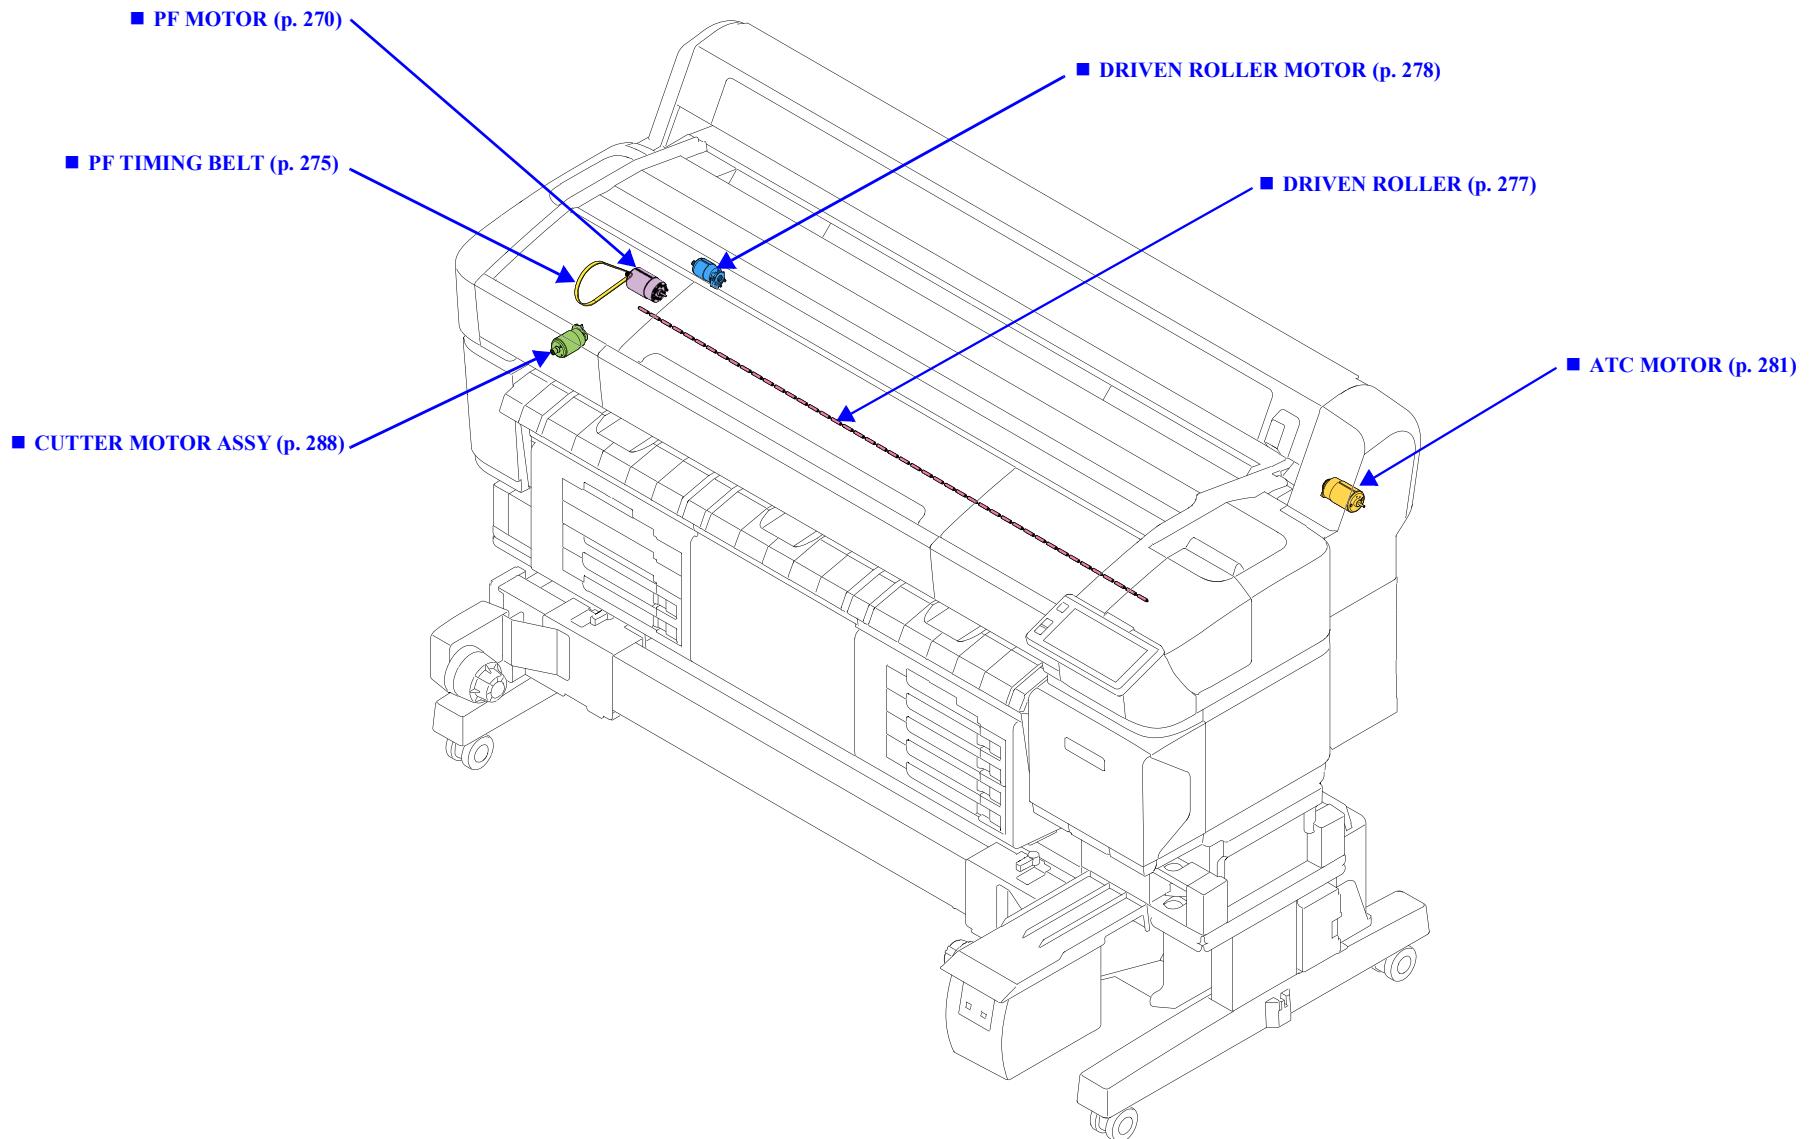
Paper Feed Mechanism / Cutter Mechanism
